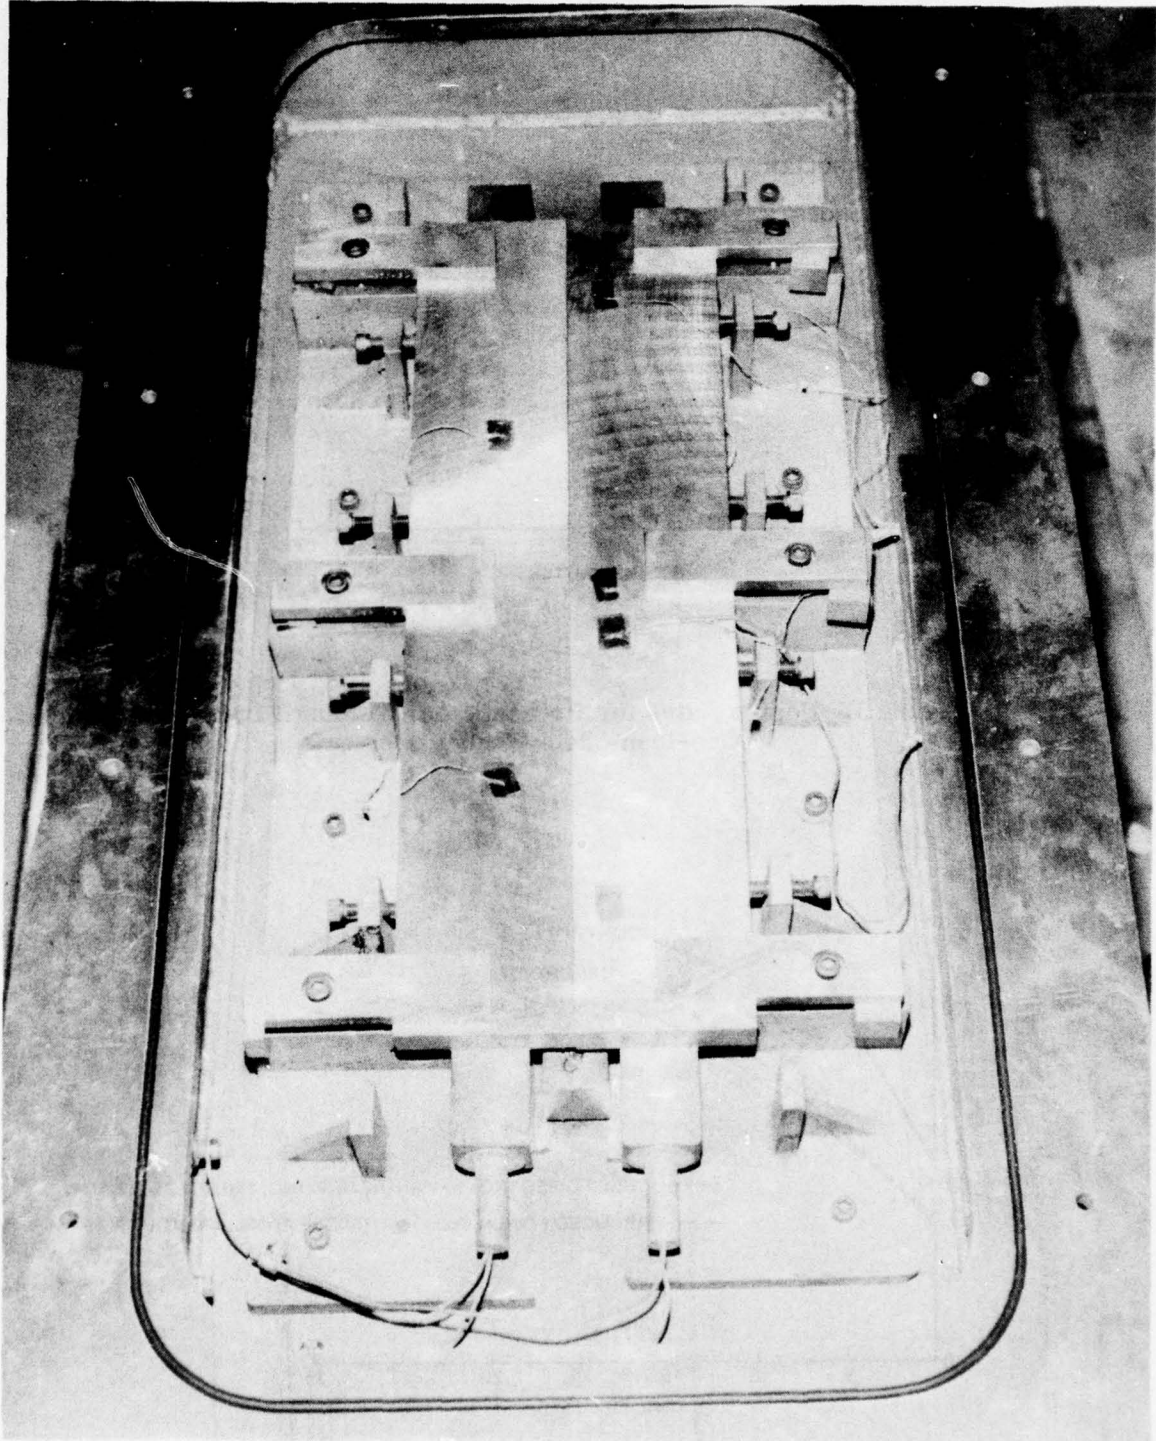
Fixture Used to SSEB-Weld 0.880-inch-Thick HY 130 Steel Plate
